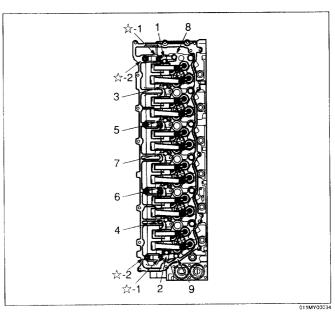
Rocker Arm Shaft Bracket Tightening Sequence
